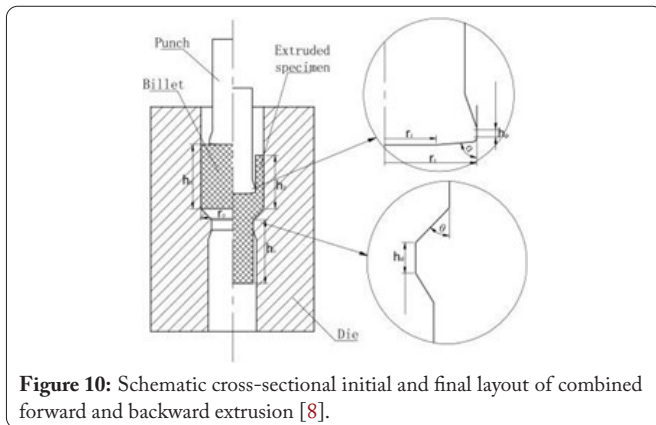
Schematic cross-sectional initial and final layout of combined forward and backward extrusion [8].
